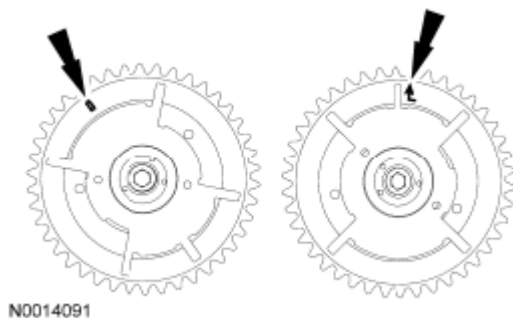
Locating RH Camshaft Sprocket Timing Mark
